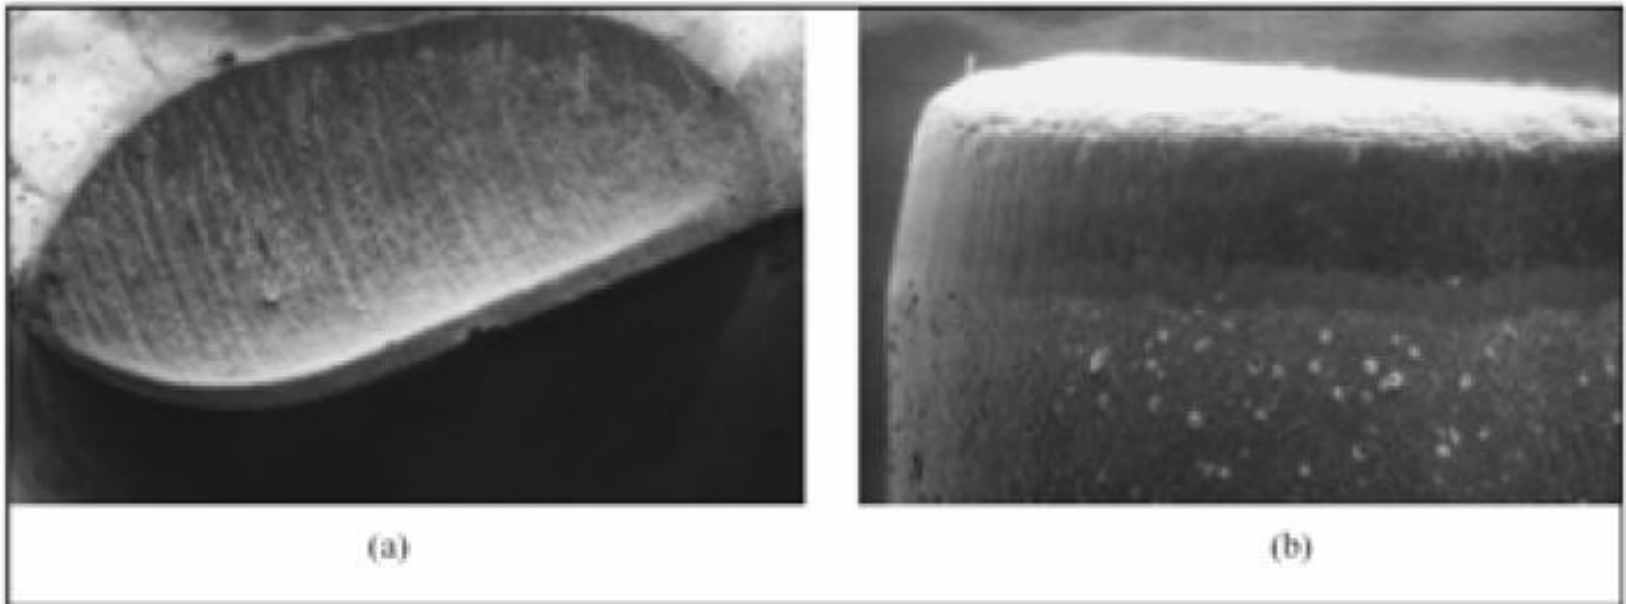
Carbide insert wear patterns: (a) crater wear, (b) edge wear. (Courtesy Kennametal Inc.)
